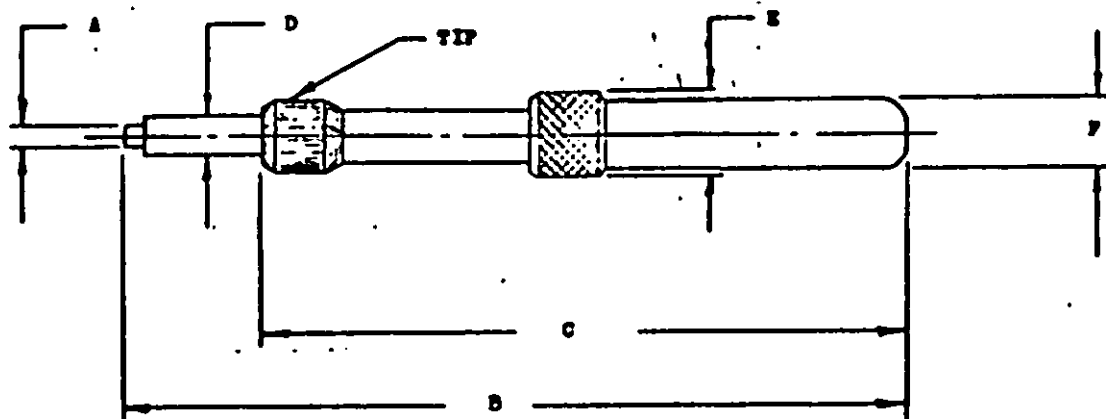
Type IV, class 1, style B, tang break-off tool for Unified Coarse and Fine thread sizes 5/16(.3125) through 1/2(.500).
